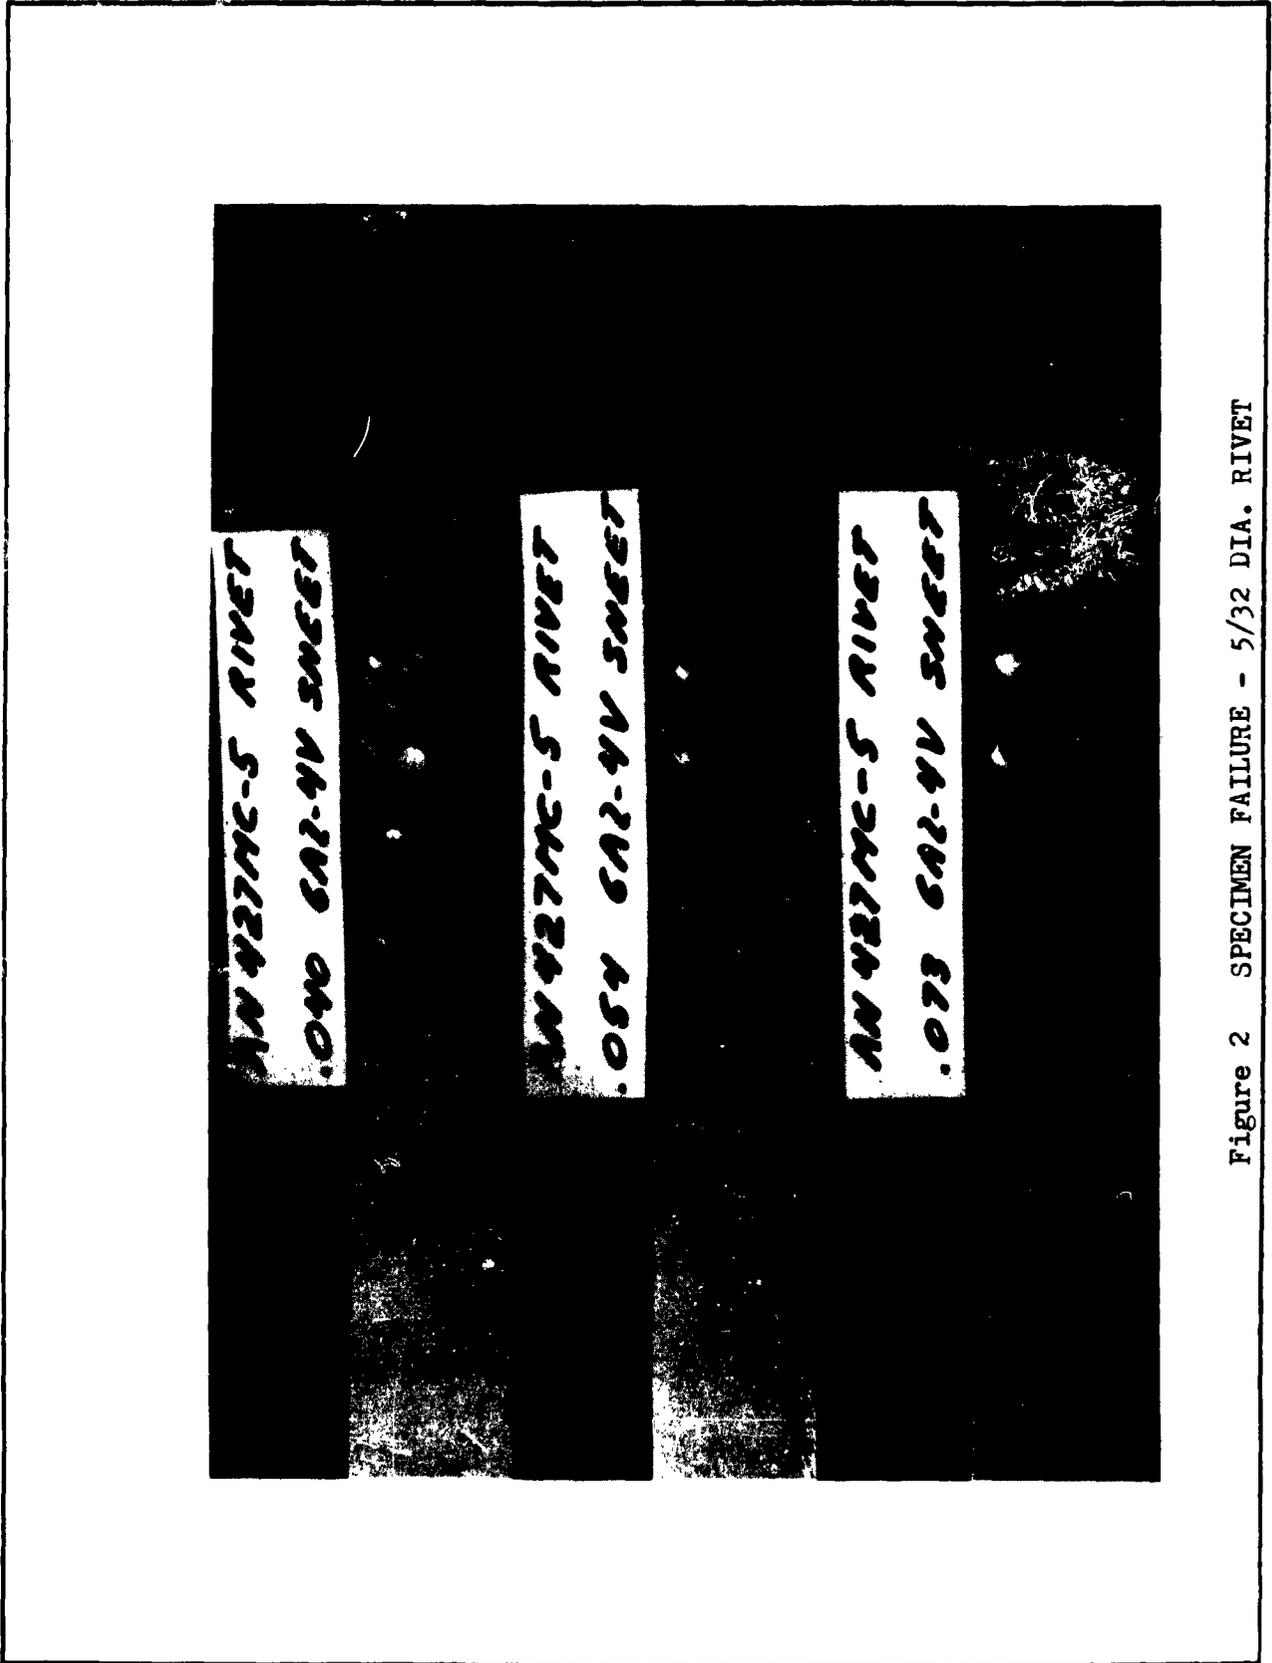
SPECIMEN FAILURE - 5/32 DIA. RIVET
